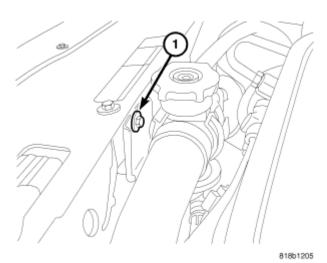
RADIATOR HOSE SUPPORT Courtesy of CHRYSLER LLC
